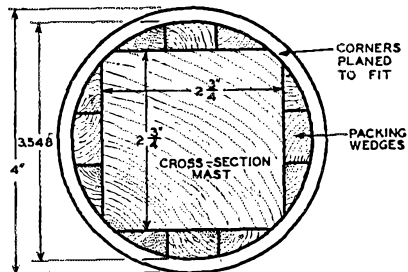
Cross-sectional view of the mast bearing showing method of wedging the pipe onto the wooden mast. The dimensions given are those used in one specific instance, and can be changed to suit the size of the mast used.
